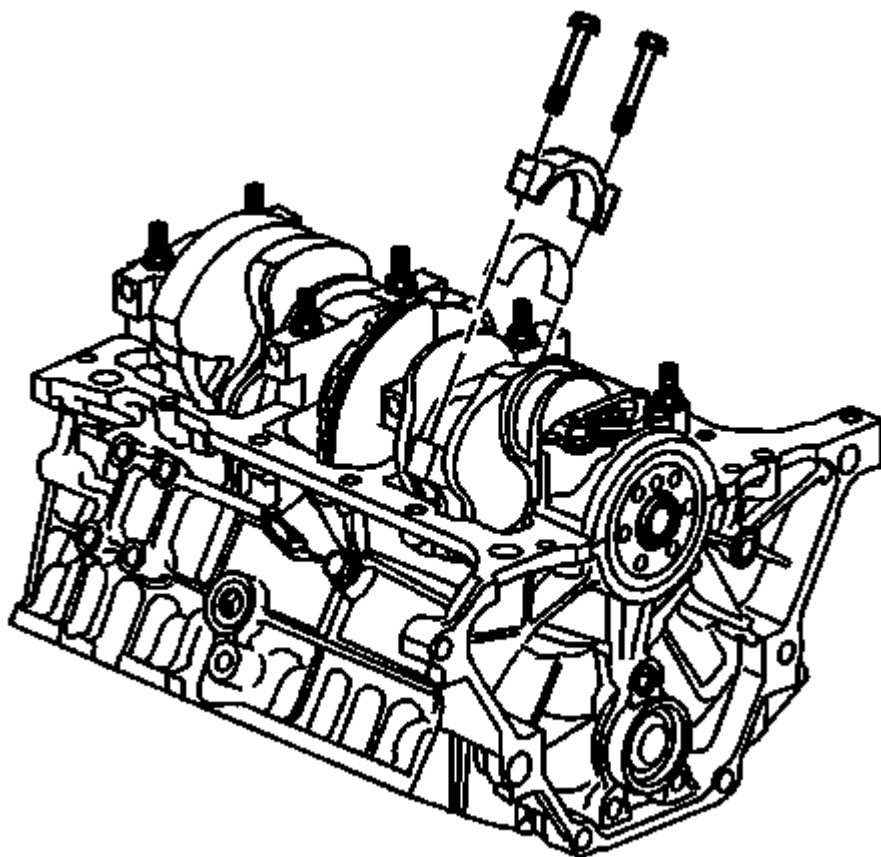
Installing Bearing, Bearing Cap And Bolts
